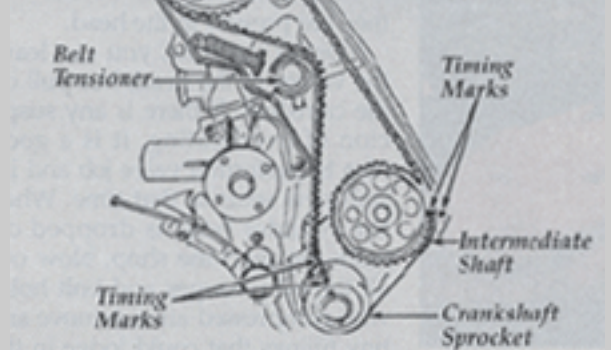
Rotate the crankshaft so the camshaft pulley mark and the crankshaft pulley mark align with the TDC mark on the timing belt cover.
